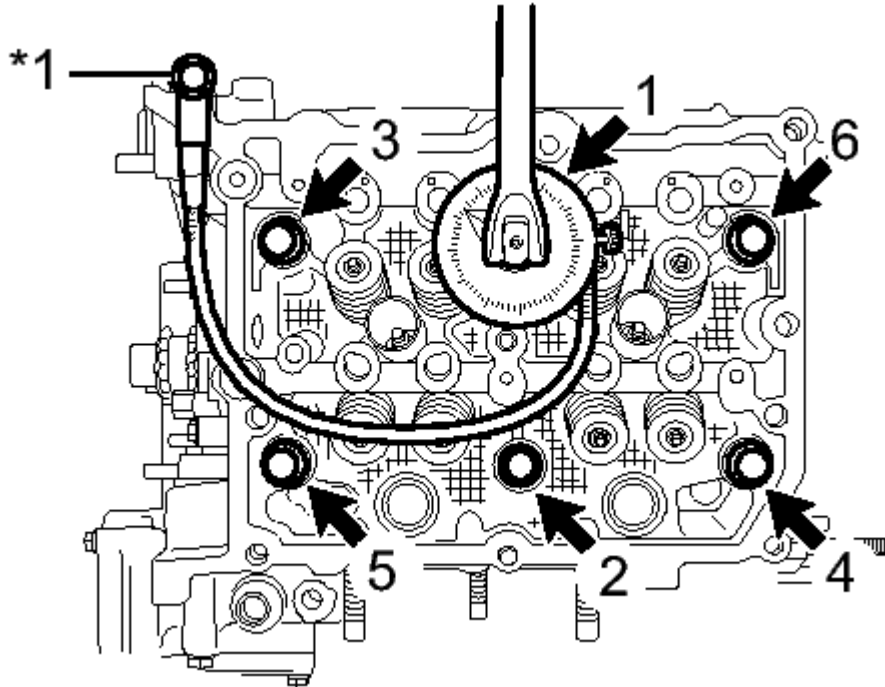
Tighten The 6 Cylinder Head Bolts In Sequence
